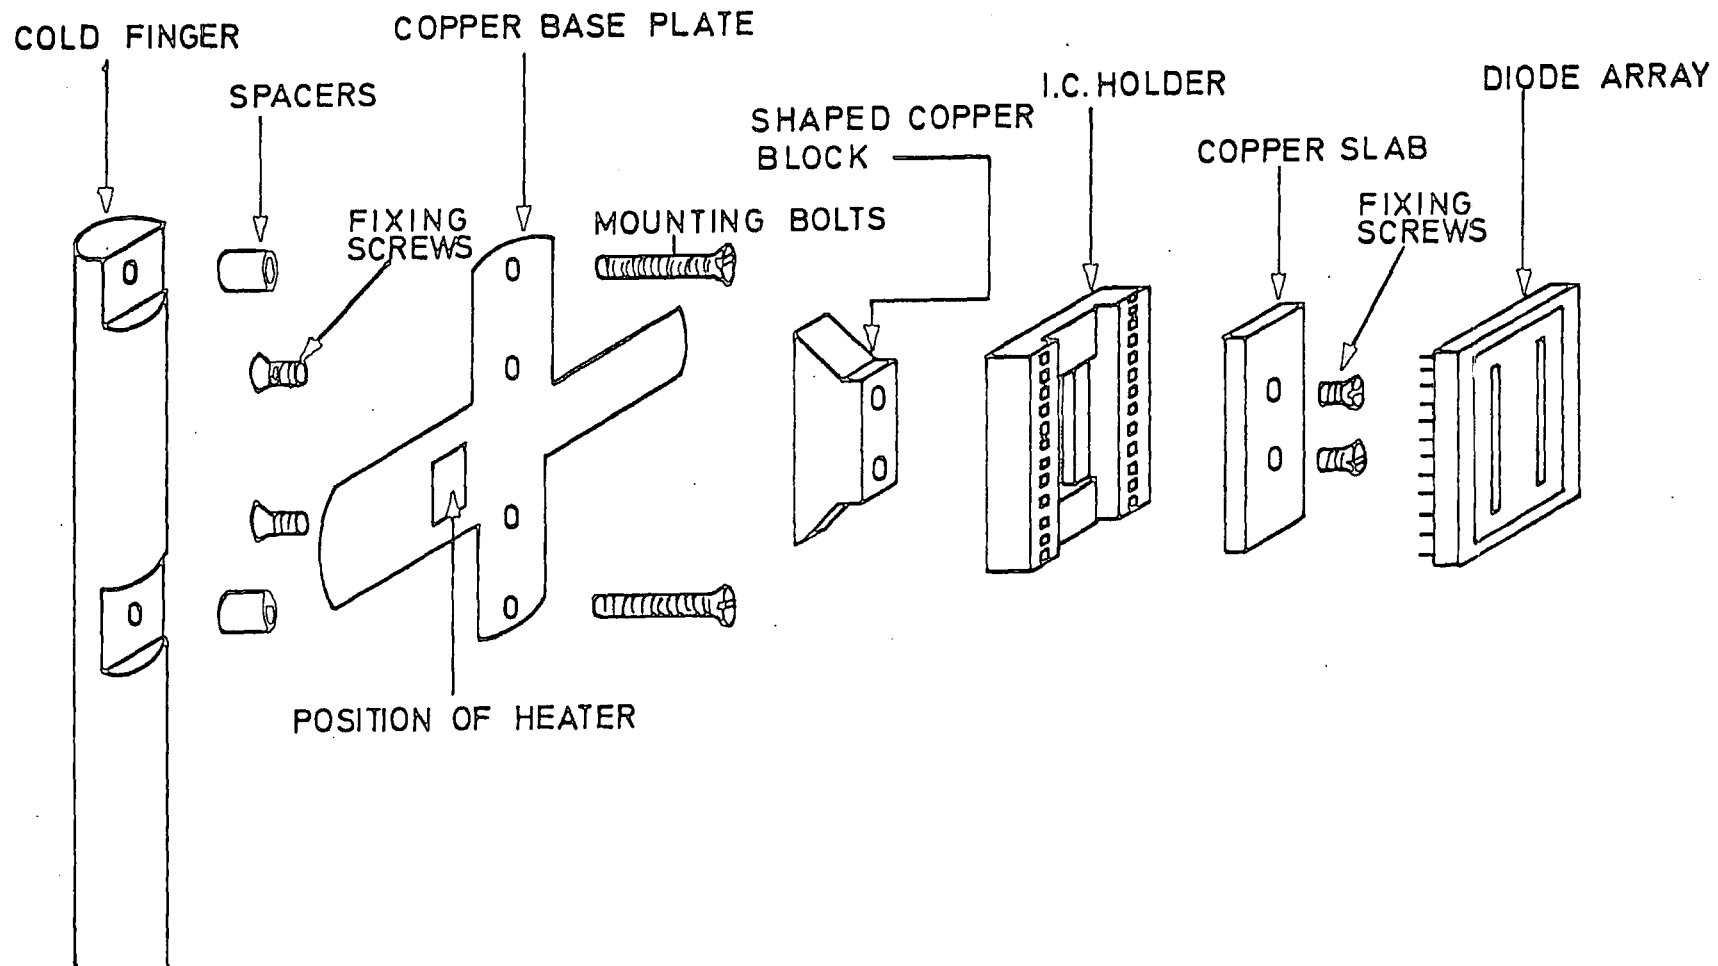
EXPLODED VIEW OF DIODE ARRAY MOUNTING
